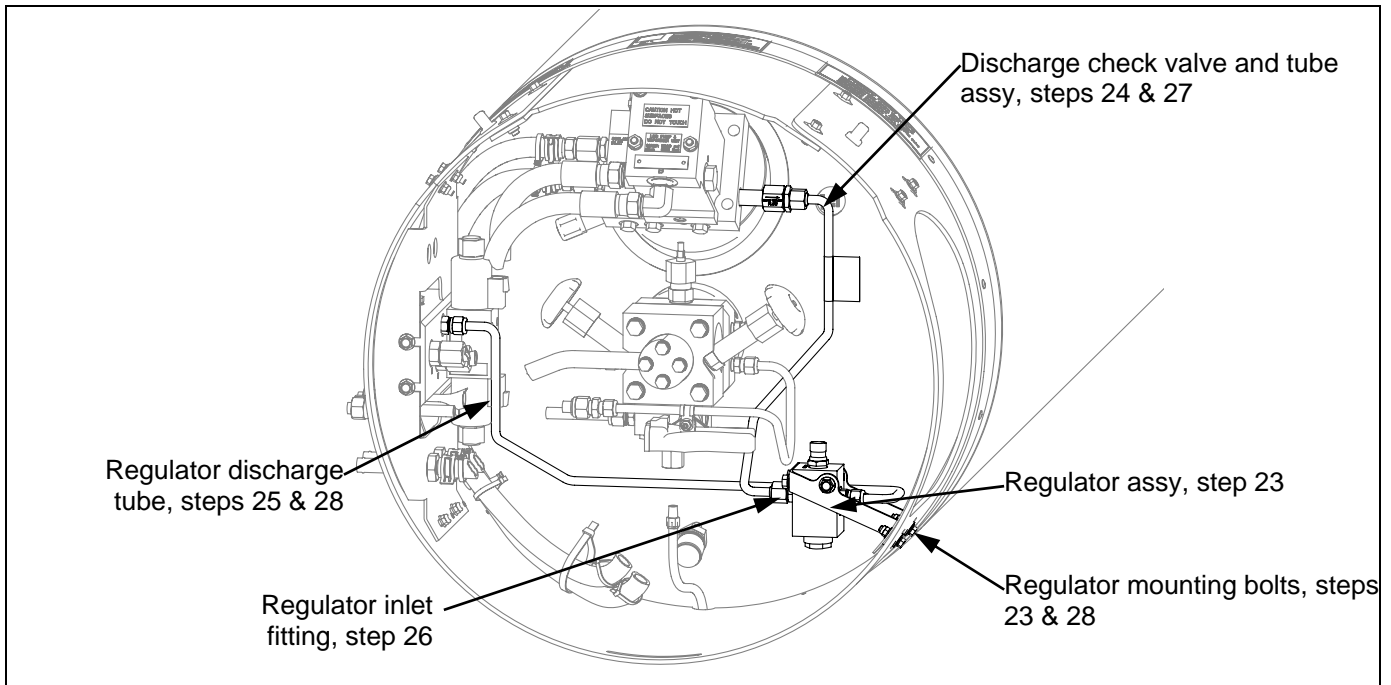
Installation location of regulator components and tube assemblies (RHS tank)
